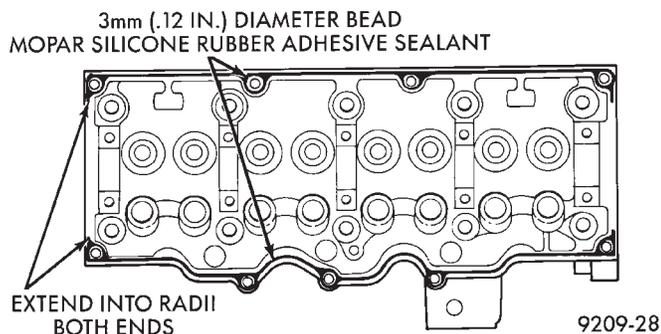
Cylinder Head Valve Cover Rail Sealing
